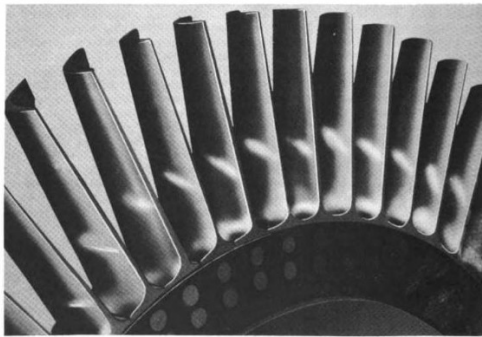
Section of the Jumo-004 Turbine Wheel.
